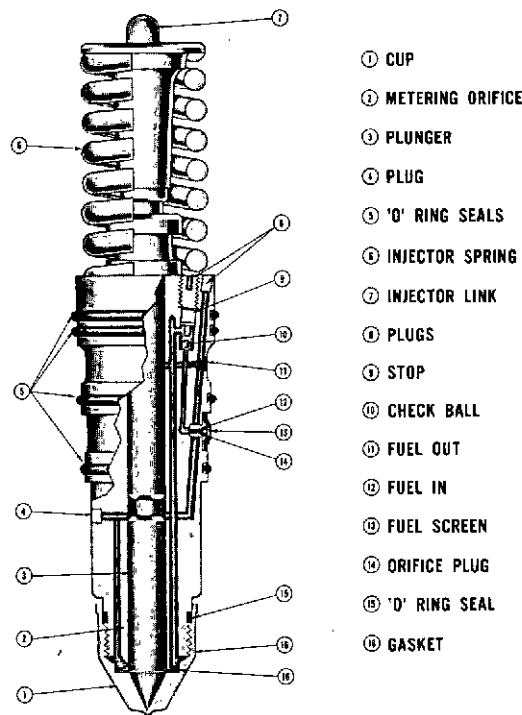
, FWC14. Cylindrical PT (type B) injector
